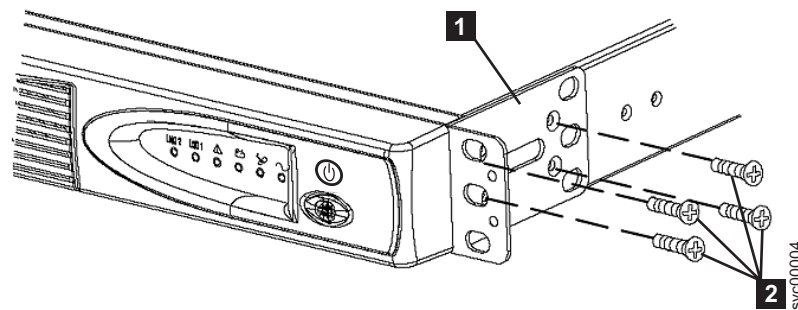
Installing the support rails for a 2145 UPS-1U into the rack
